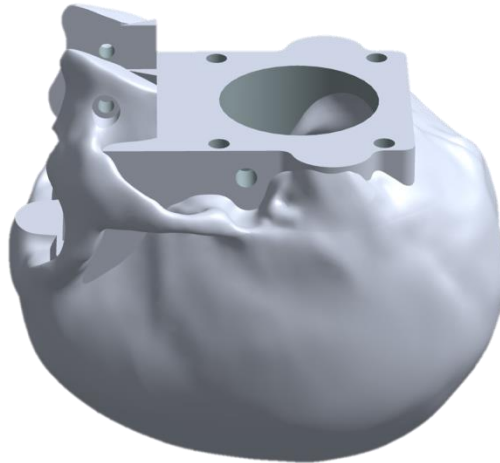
CAD image showing filling hole and location of M6 insert holes on the cranium component.
